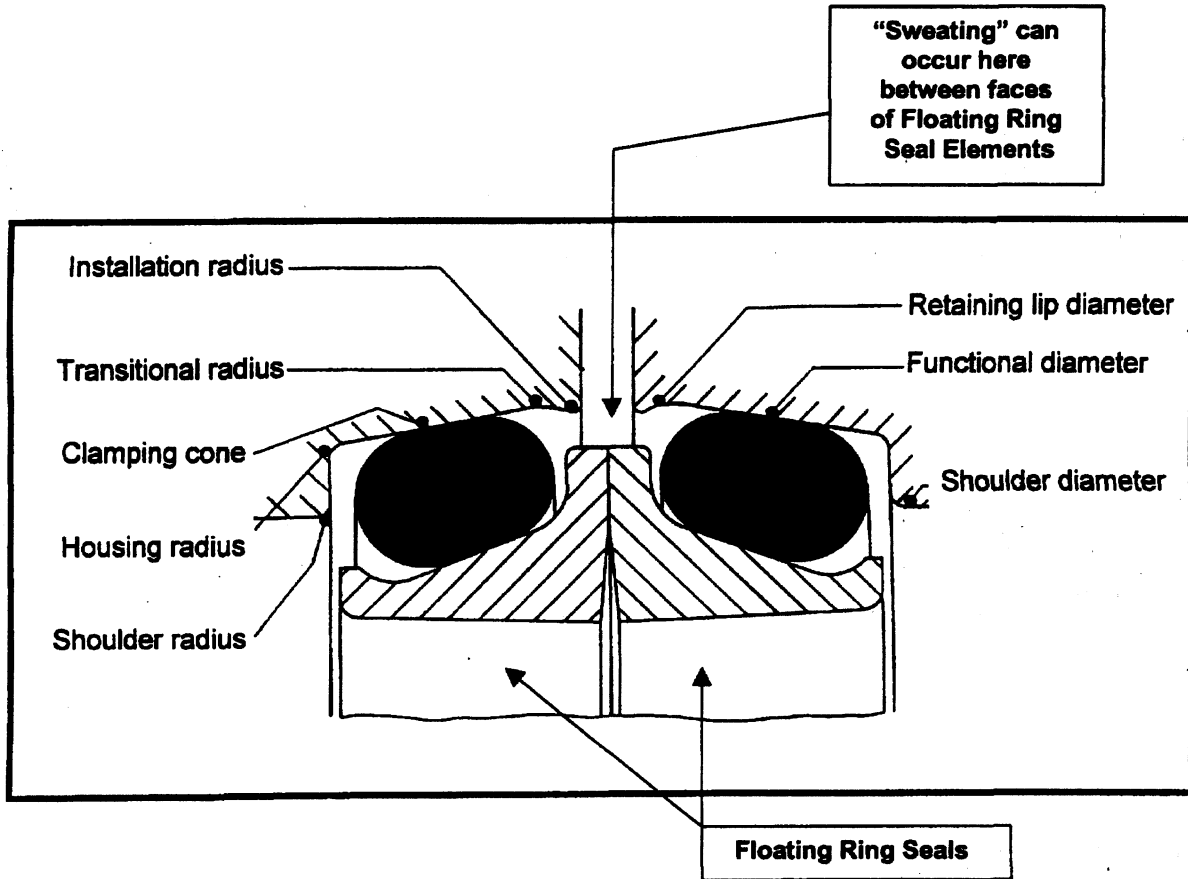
Enlarged detail of Floating Ring Seal assembly
